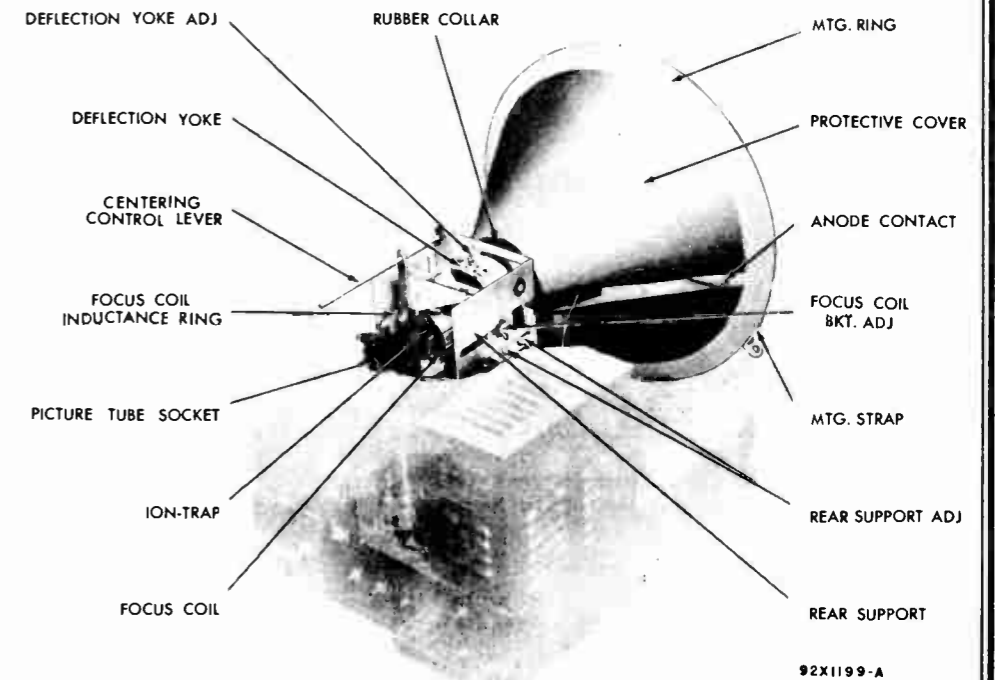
PICTURE TUBE MOUNTING DETAIL
